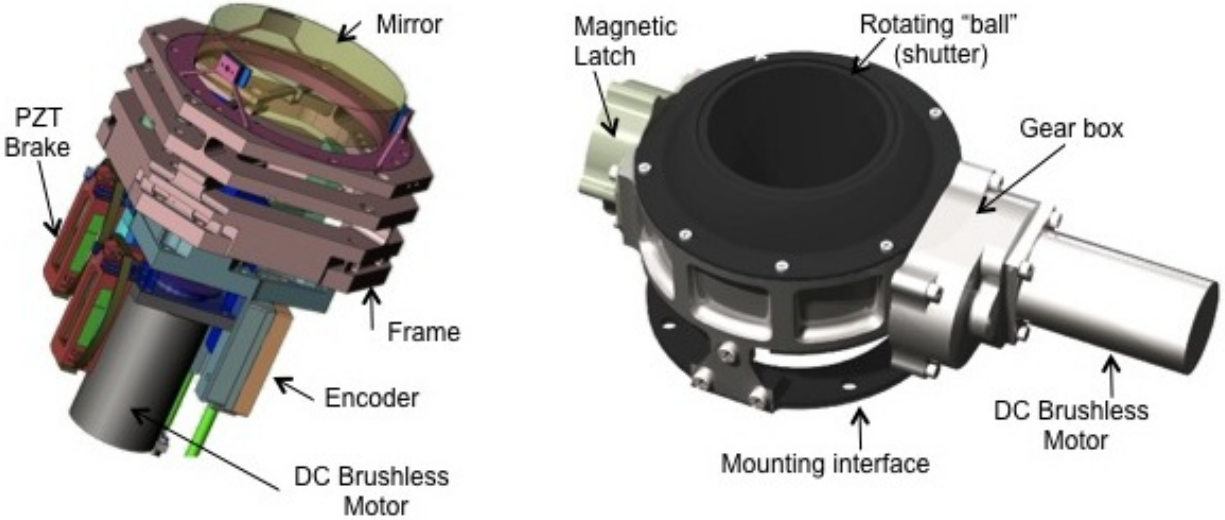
Left: A view of the alignment mirror mechanism (AMM). Right: A view of the shutter assembly.
